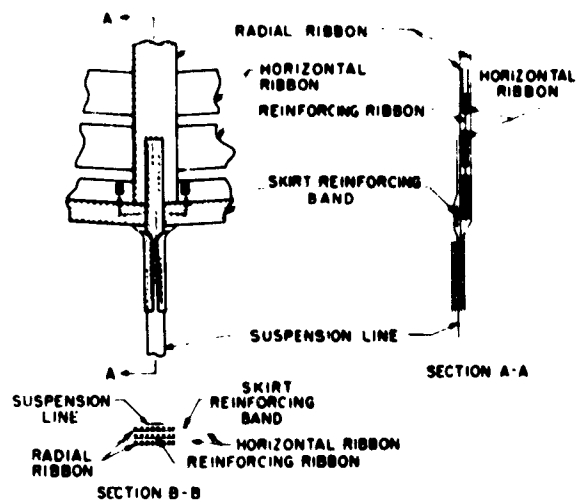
Suspension Line Connection to Skirt, Flat Circular Ribbon Canopy
